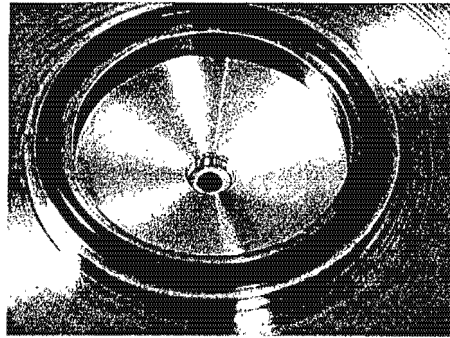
A photograph of the conical vault used to enclose the pressure vessel is shown. The cone shape was designed so that bubbles could easily be removed from the pressure chamber during the filling process. A threaded plug was used as a final seal of the vault.
